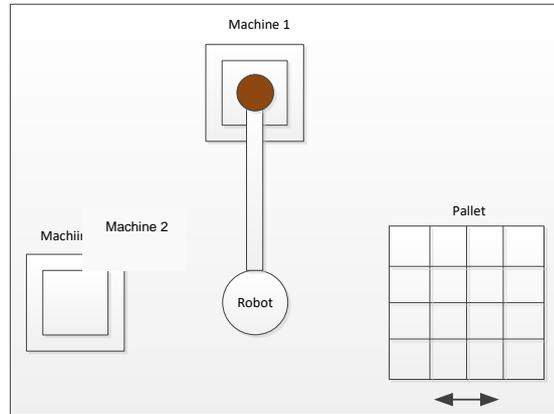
Flexible Manufacturing Cell with two machines, one robot and one pallet
